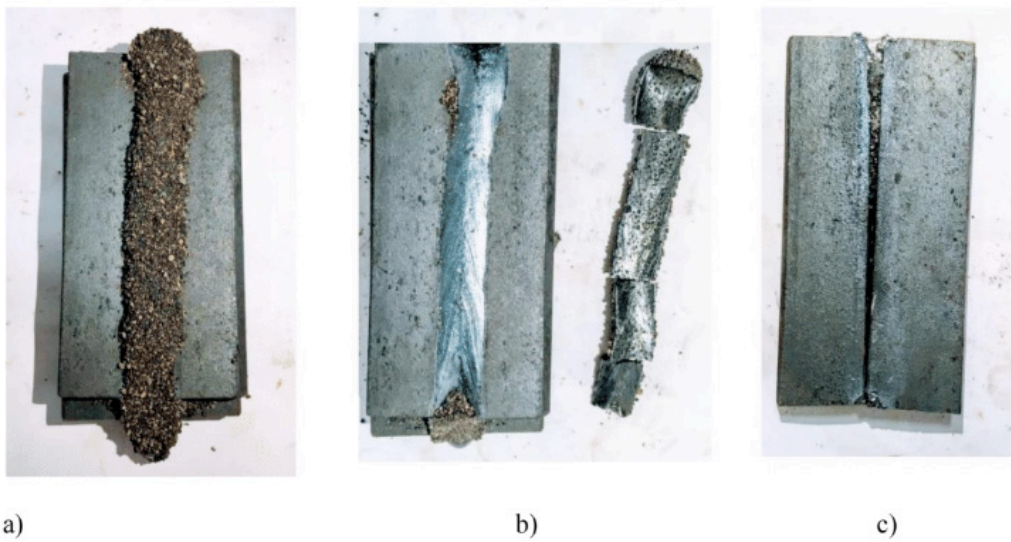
Welding on the 300 A plate - a) with scum b) no scum c) background of the piece
